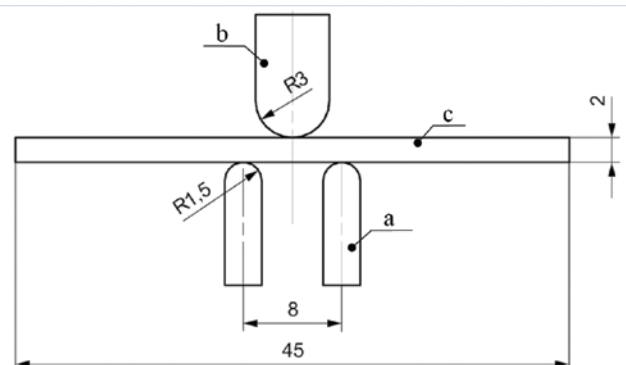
Scheme of load and support of samples used in three-point bending tests: a – support, b – punch, c – test sample
